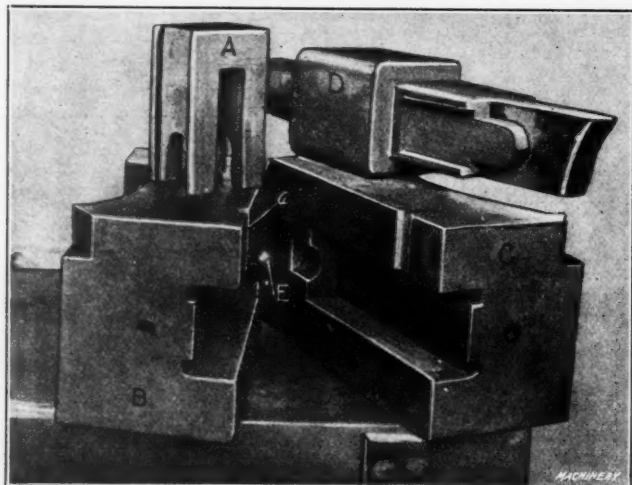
Dies and Tools used for forming a Driver Brake Adjusting Rod Block in a 5-inch Ajax Forging Machine
